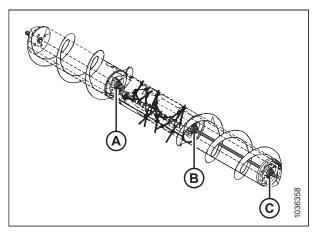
Bearings with Grease Fittings on Auger – View from Right Side
